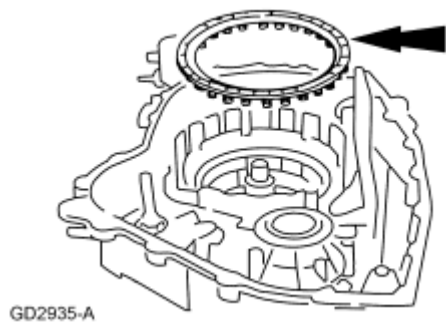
Low/Reverse Clutch Return Spring Assembly
